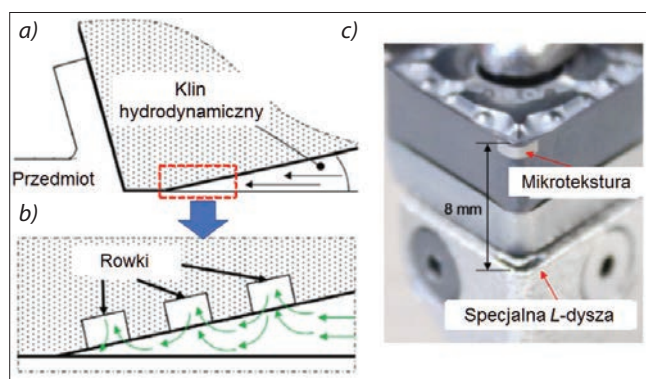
Scheme of coolant flow patterns for: a) non-textured and b) micro-textured cutting tool, and c) tool holder with a micro-textured flank face inserts and a specially inserted L-nozzle [2, 14, 16].
